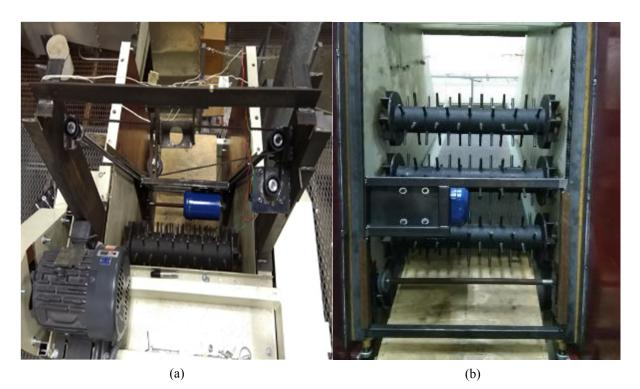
The designed brush-based plastic removal mechanism: (a) top view, (b) front view.
